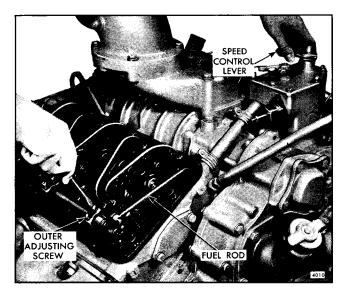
Positioning No. 3L Injector Rack Control Lever
